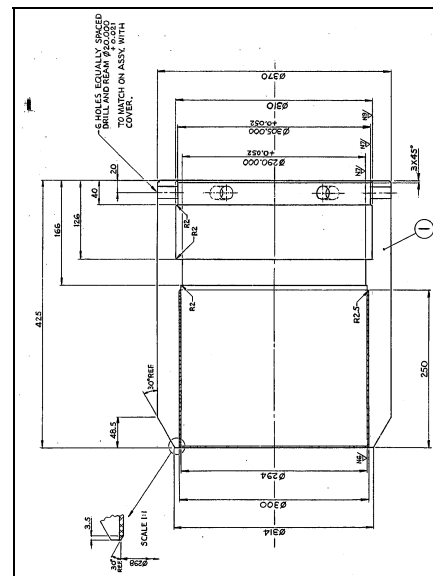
HP valve of P91 with stellite layer welded on interior of cylinder
